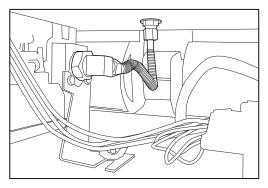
Remove the burner to be nut either from the bulkhead or the brass elbow. the valve can then be removed.
